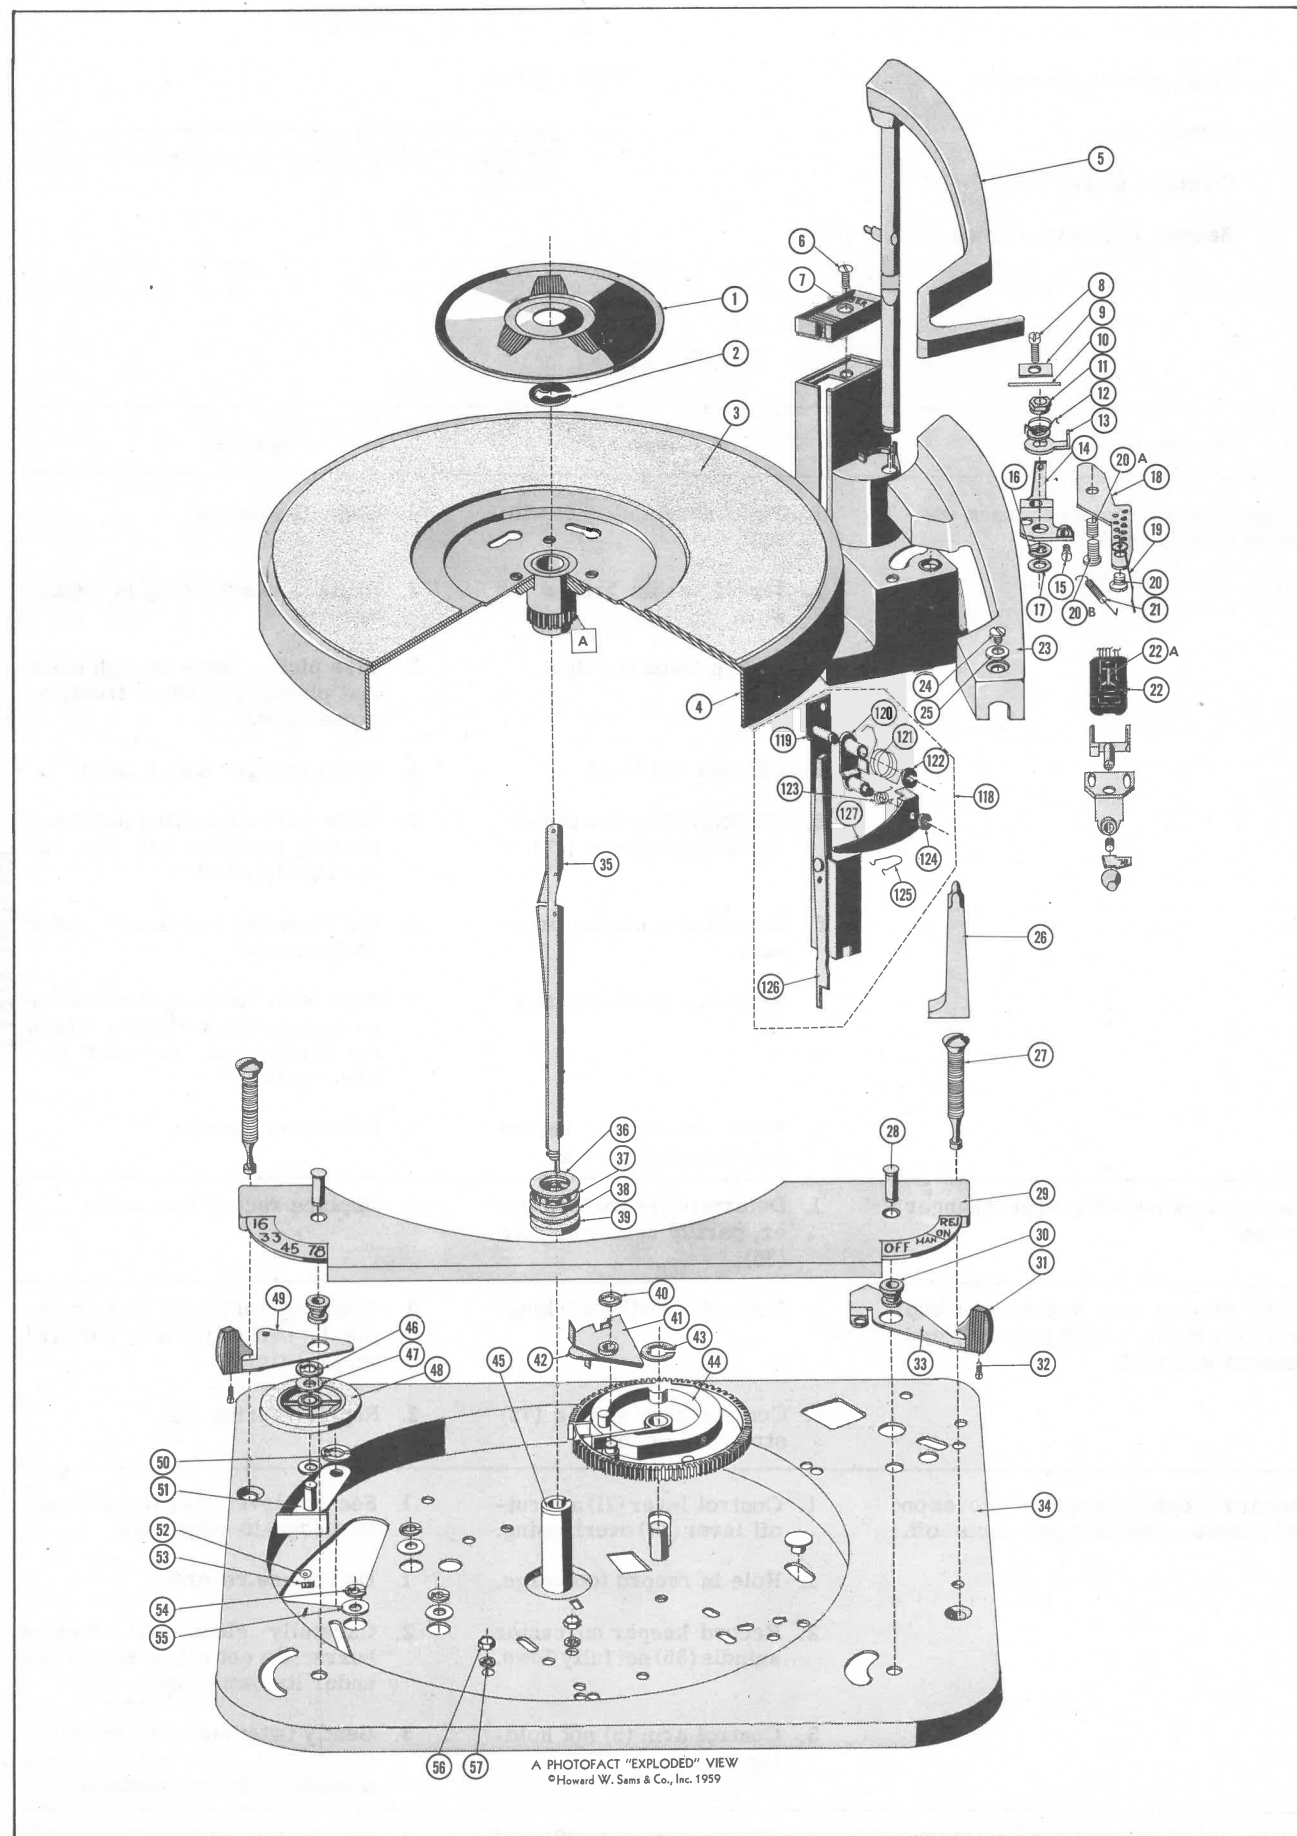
A EXPLODED VIEW OF PARTS ABOVE BASEPLATE
